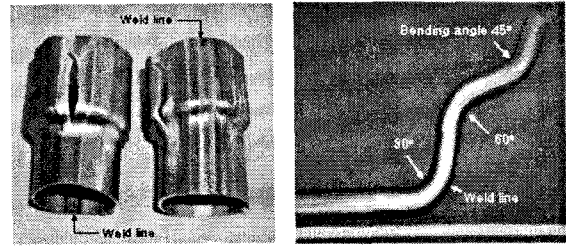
Photographs of the GTA welded pipe after bending test (circle represents the crack around the weld)
